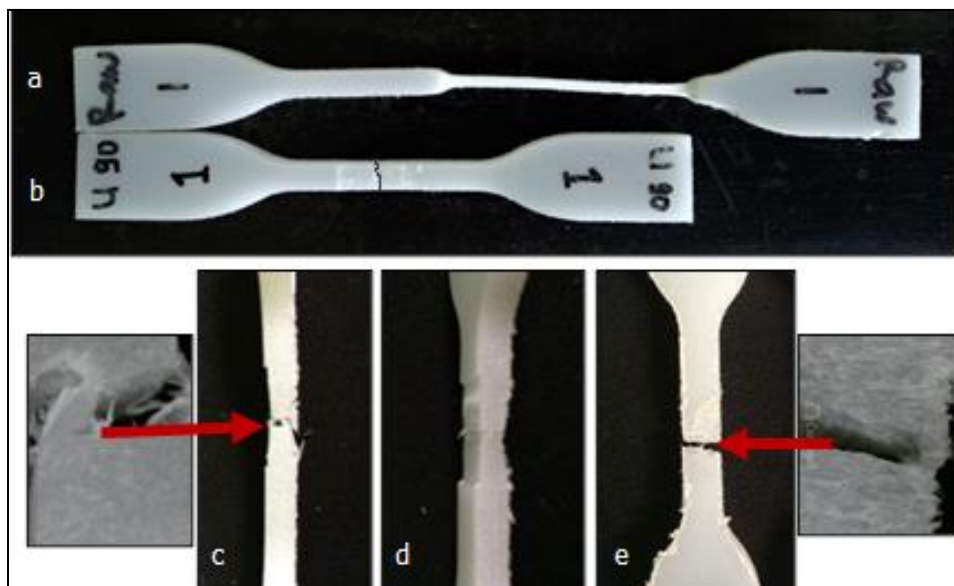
HDPE Tensile tested specimen: a) raw material, b) FSW-ed single side welding pass at 900 rpm, FSW-ed double side welding pass at: c) 900 rpm, d) 1500 rpm, and e) 2000 rpm
